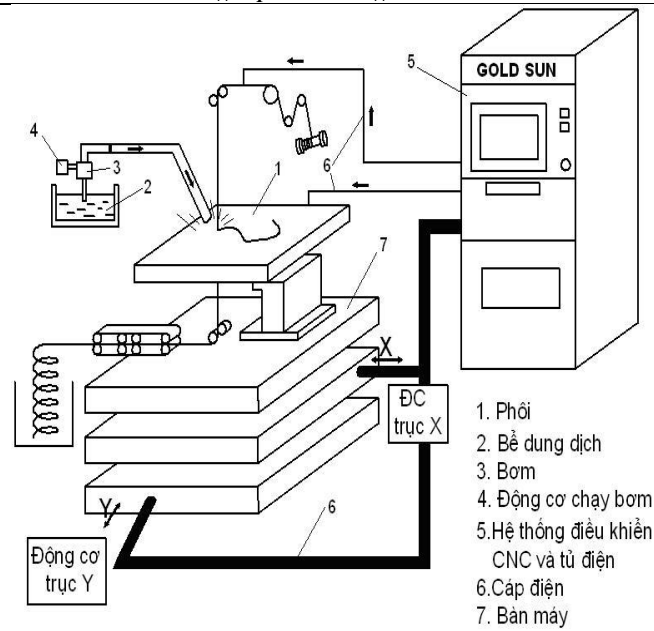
Schematic diagram of the WEDM machine principle [2]
